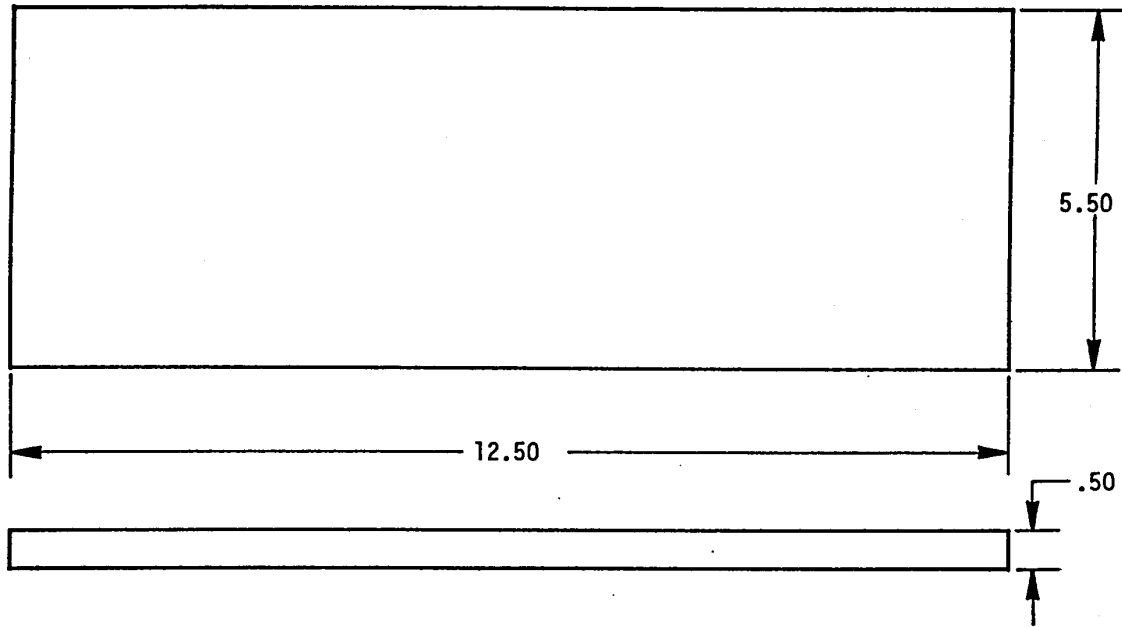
Installation, shipping 105MM gun tube - Continued.
